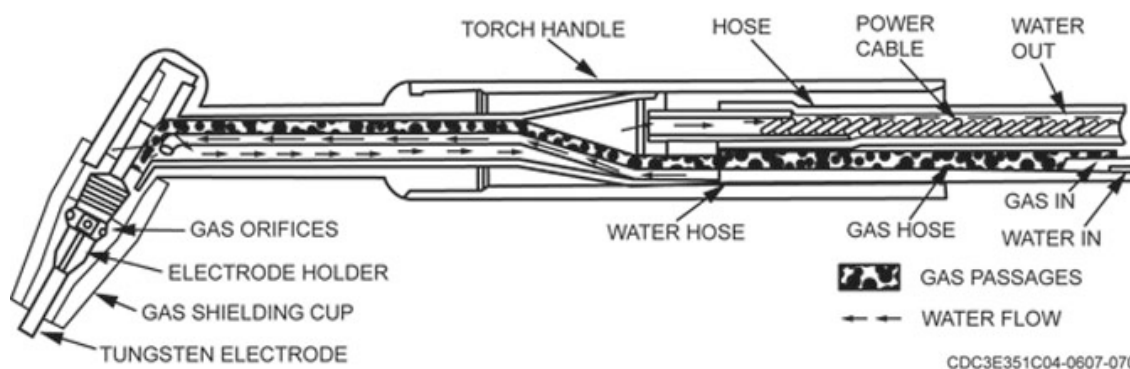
Water-cooled, inert gas shielded welding torch.
